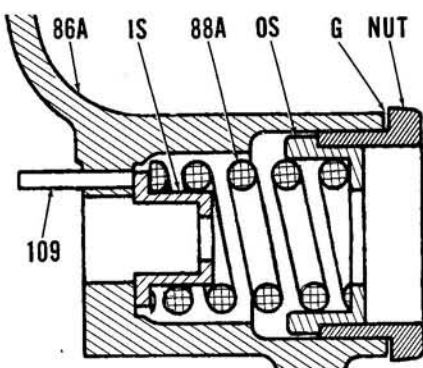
Cross-sectional view showing model "New FSM" main control spring. Refer to text for procedure to adjust spring.
